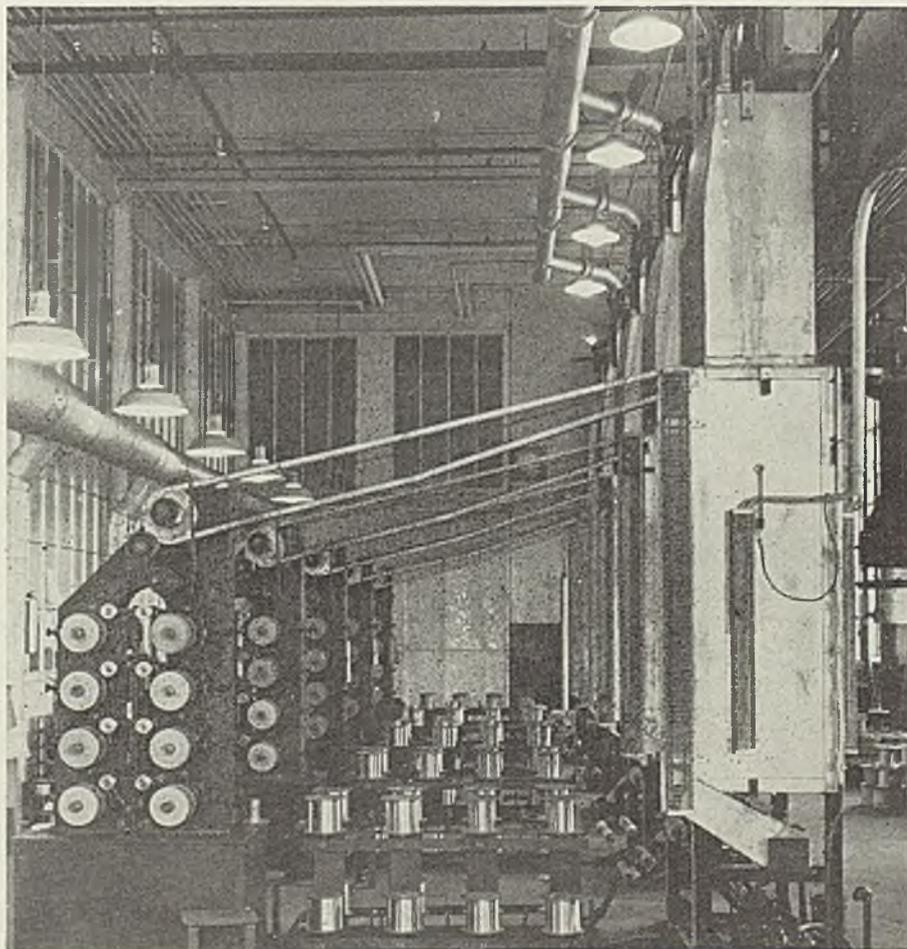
Enameling machine; 16 heads, electric oven and bare wire stand, at River works of General Electric Co., West Lynn, Mass.
